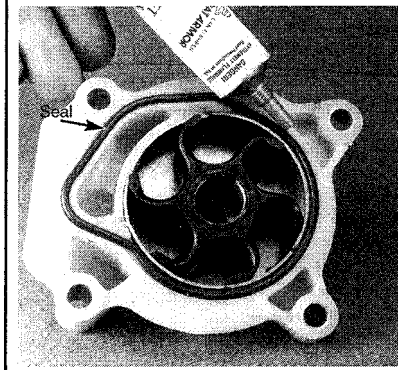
Apply a thin bead of sealant, then install the pump housing O-ring seal
